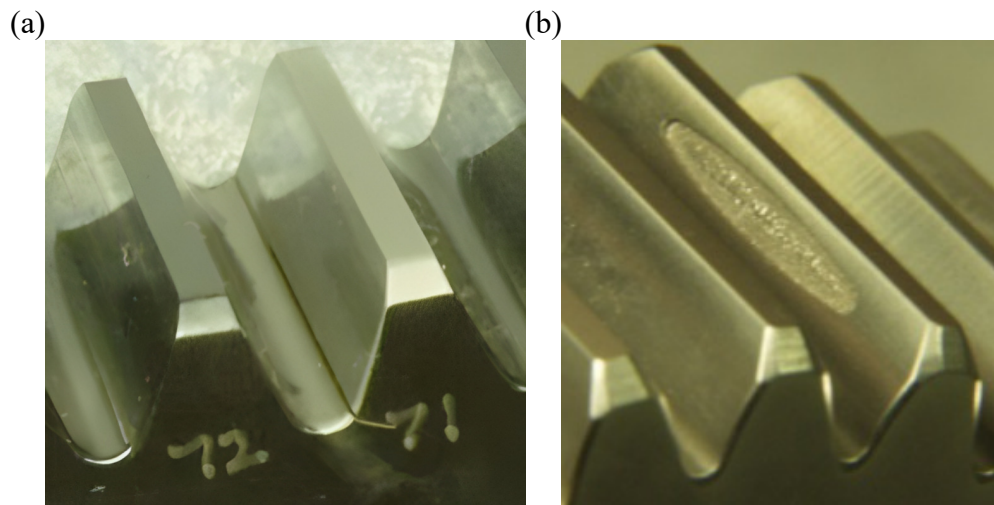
(a) Tooth root crack damage on the ring (space-fixed) gear tooth and (b) tooth surface pitting damage on the rotating planet gear tooth in the planetary stage of the transmission. These images are taken from Ref. [4]. The root crack and surface pitting damages were produced as part of seeded fault experiments in Ref. [4].
